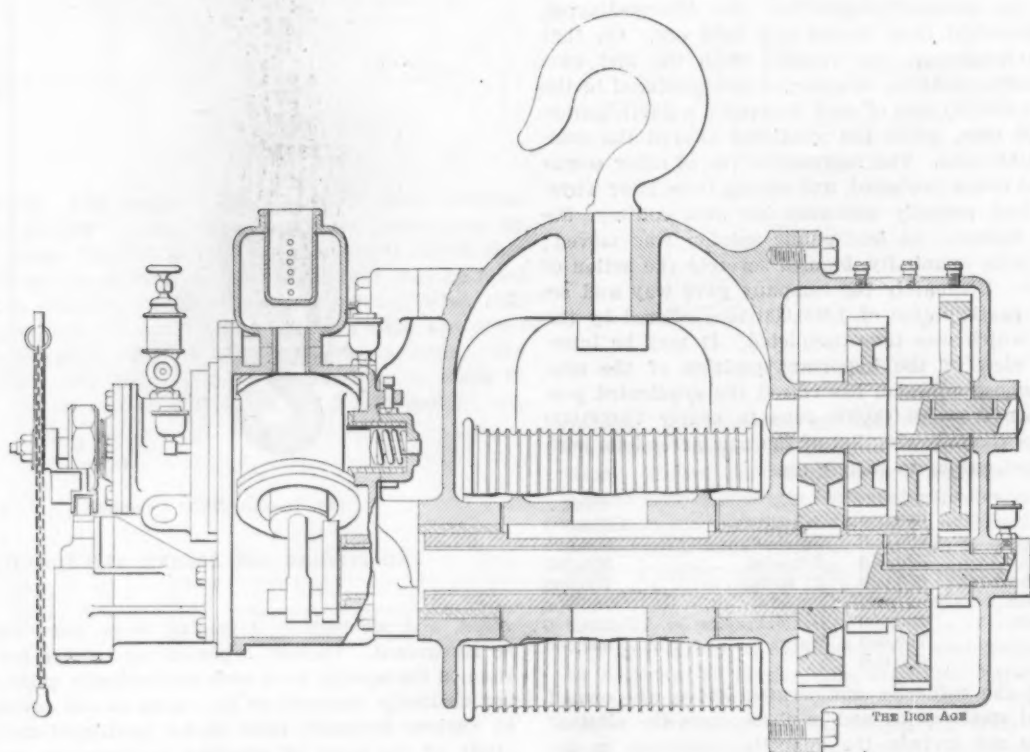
Elevation of Hoist, Partially in Section, Showing Drum Gearing.
